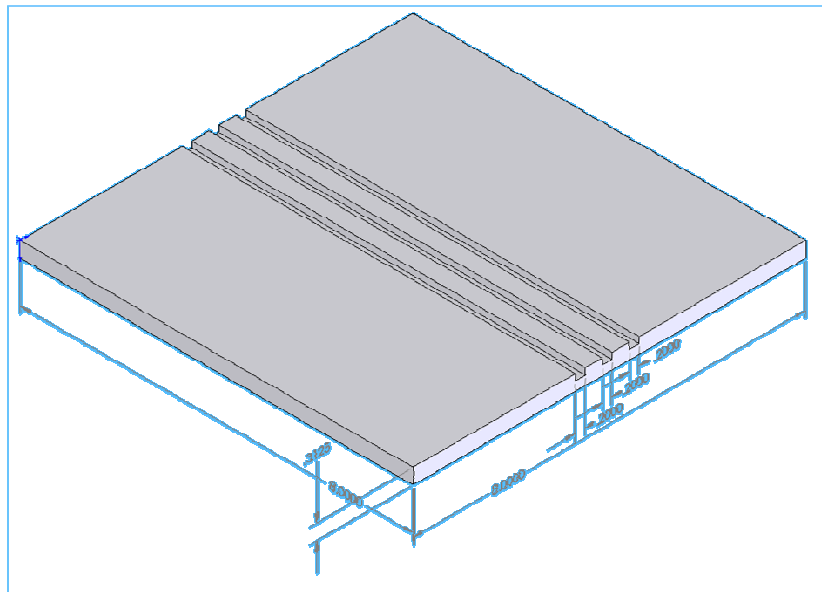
CAD projection of secondary anvil allowing thermocouple probes to exit back of workpiece. All distance is in inches.
